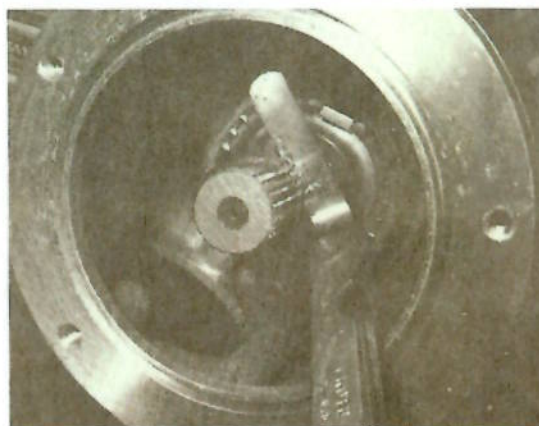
CHECKING CLEARANCE WITH A FEELER GAUGE.
